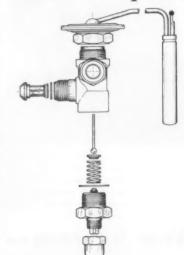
Exploded view drawing of valve, showing principal parts. Valve has only three moving parts-diaphragm, ball and rod, and spring.
